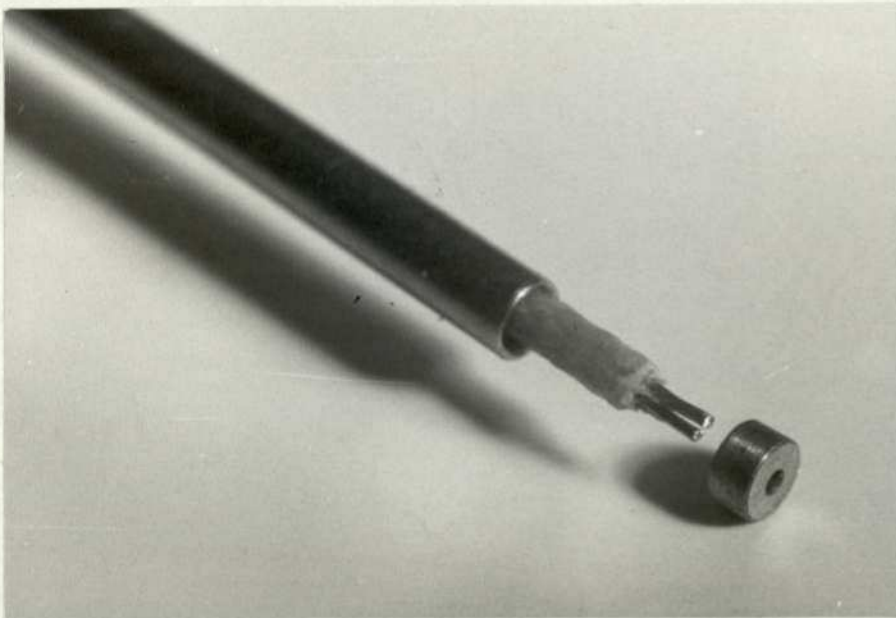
THERMOCOUPLE ASSEMBLY DETAILS
